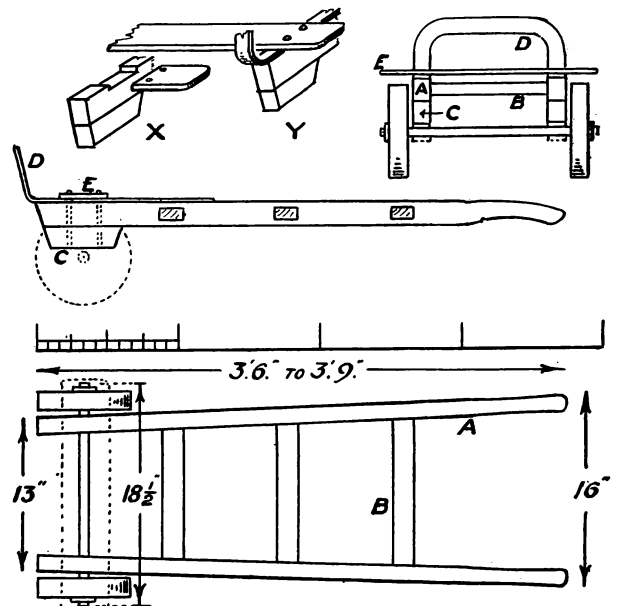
SACK TRUCK : PLANS AND ELEVATIONS.
